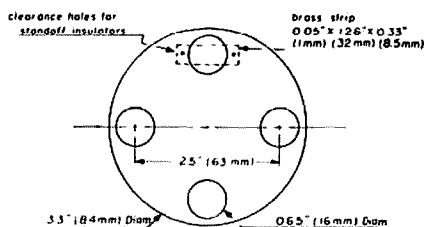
Plate connector and bypass disk. Each tube hole has Instrument Specialty Company 97-70 finger stock soldered on the inside. The Teflon sheet is also cut to the same dimensions.
